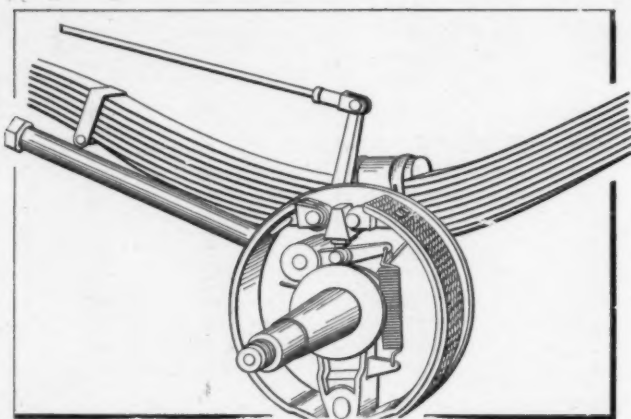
End of rear axle with wheel removed, showing brake-drum, band, facing, and toggle system
